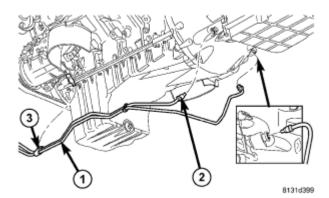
Engine Oil Cooler, Coolant Hose, Filter & Lower Radiator Hose Courtesy of CHRYSLER LLC
